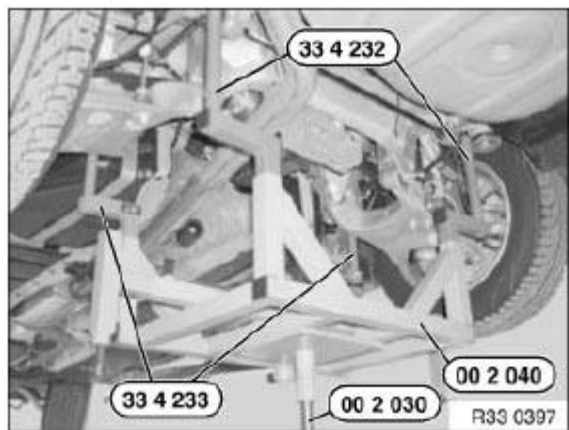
Identifying Special Tools (33 4 233 And 33 4 232) Into Corresponding Mountings
